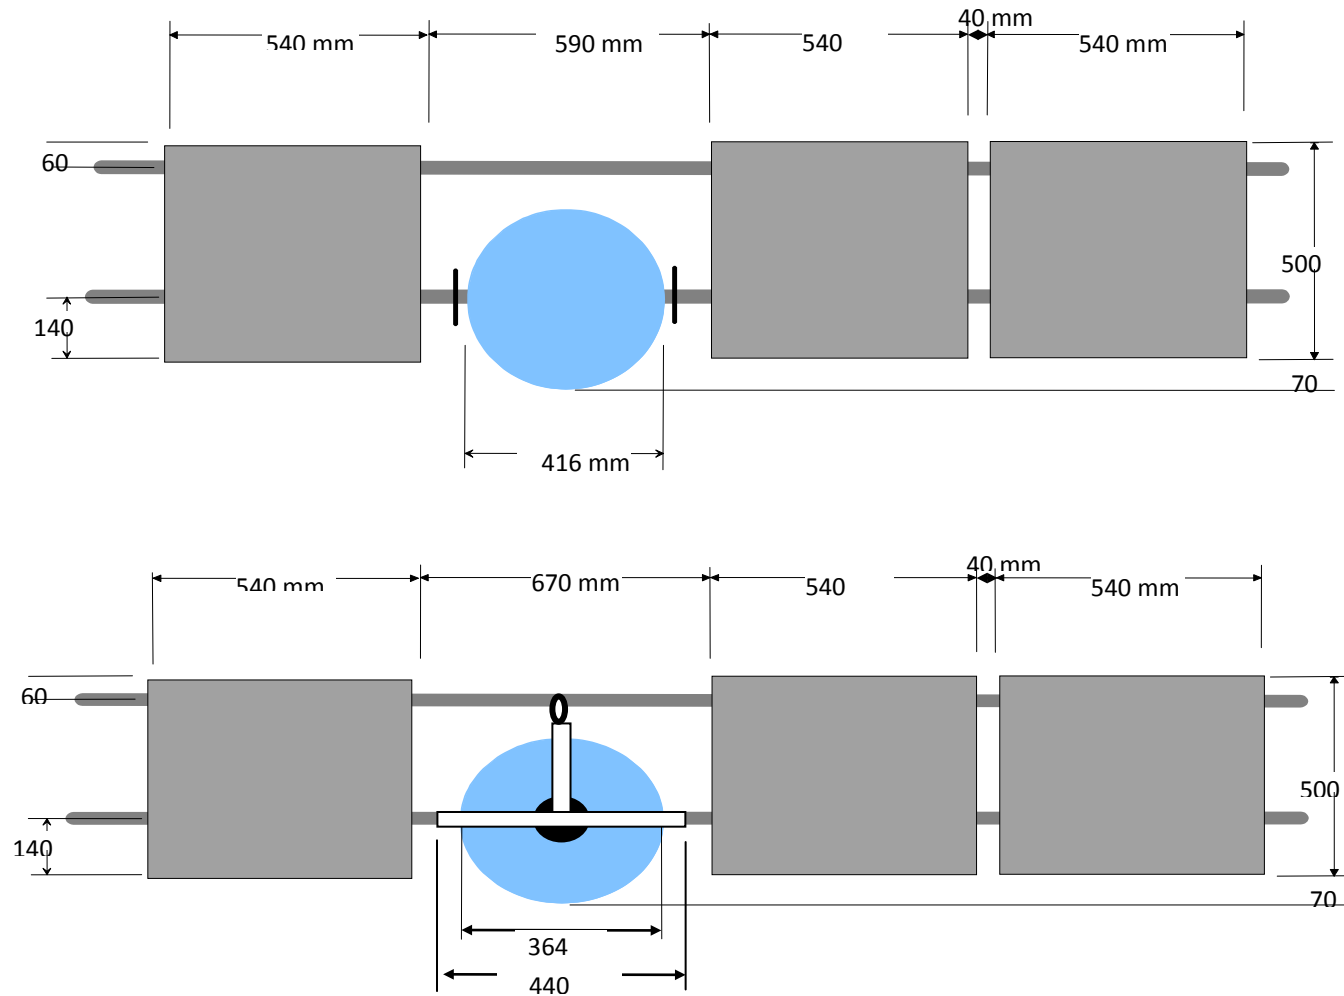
Dimensions of the modified plate gear, mid section (top) and side section (bottom)
